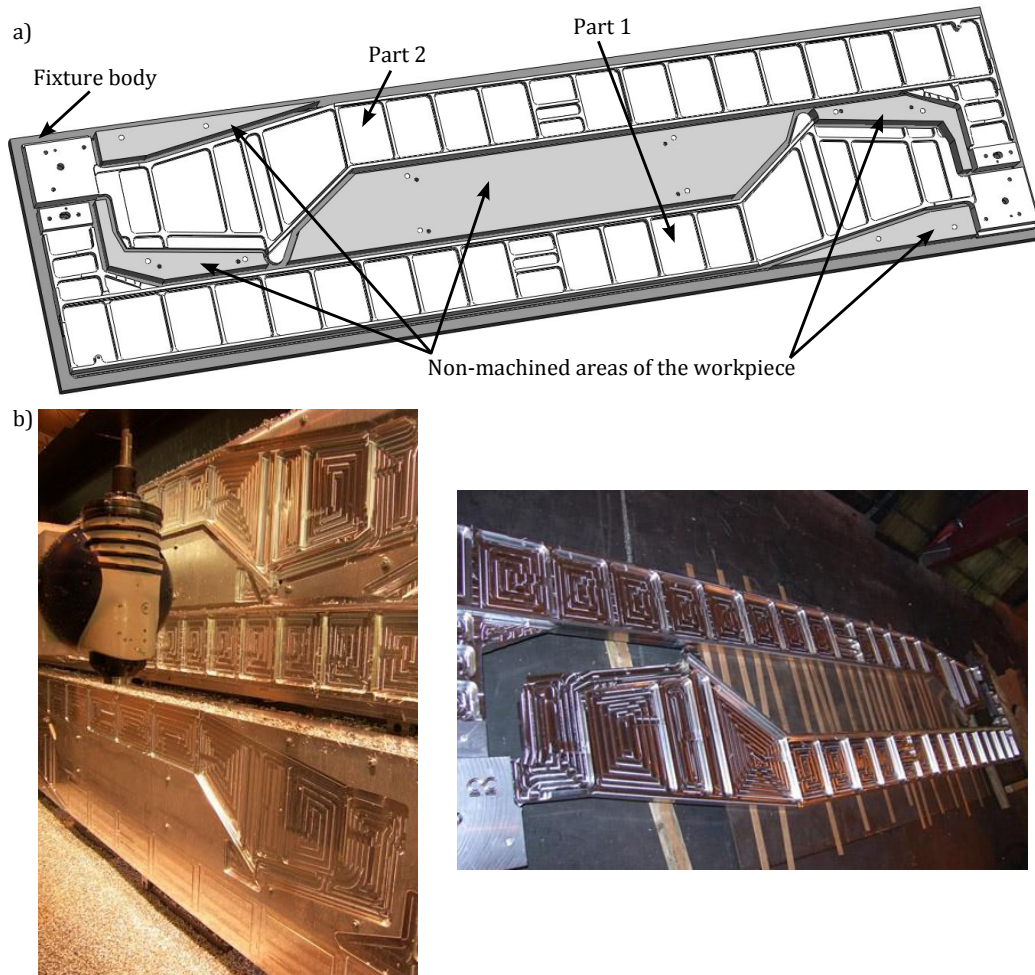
The machining of the structural part: a) The CAD representation of the machining in pairs ; b) real machining of the parts [6]
